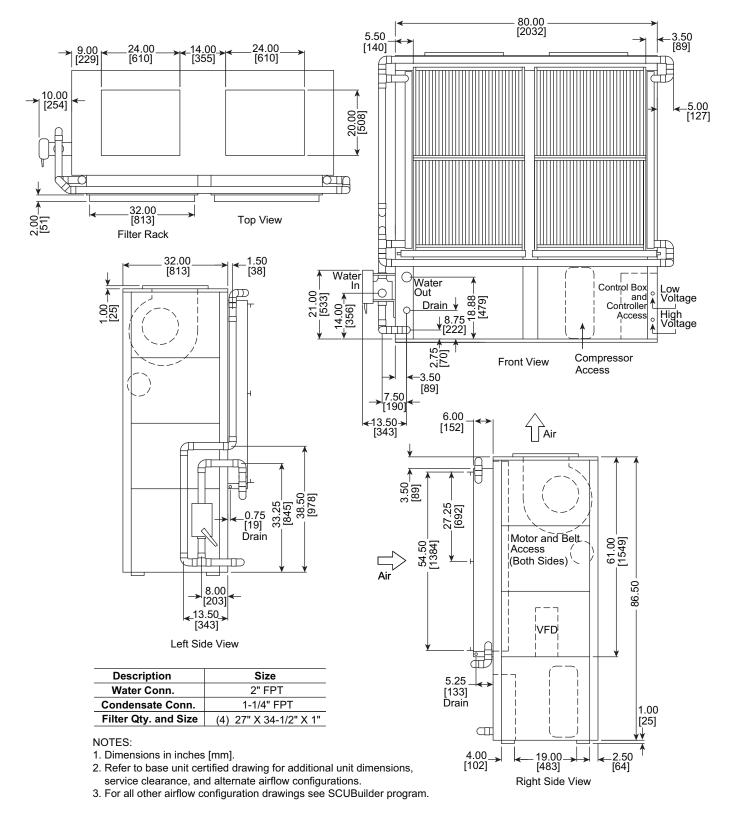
50BVJ 020-028 Dimensions Front Return, Top Supply with Optional Waterside Economizer
